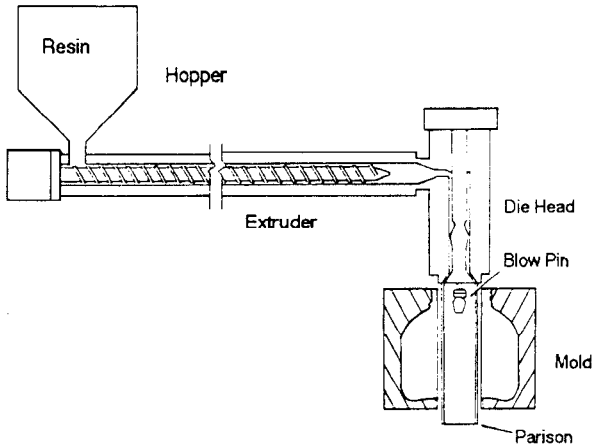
(b) Extrusion Blow Molding of a Bottle [Miller, 1983]. Hopper, reciprocating extruder screw, die head, extruder parison, and molds shown in open position. The extruder rotates and reciprocates continuously, providing continuous mixing of resin with intermittent extrusion of parisons.
